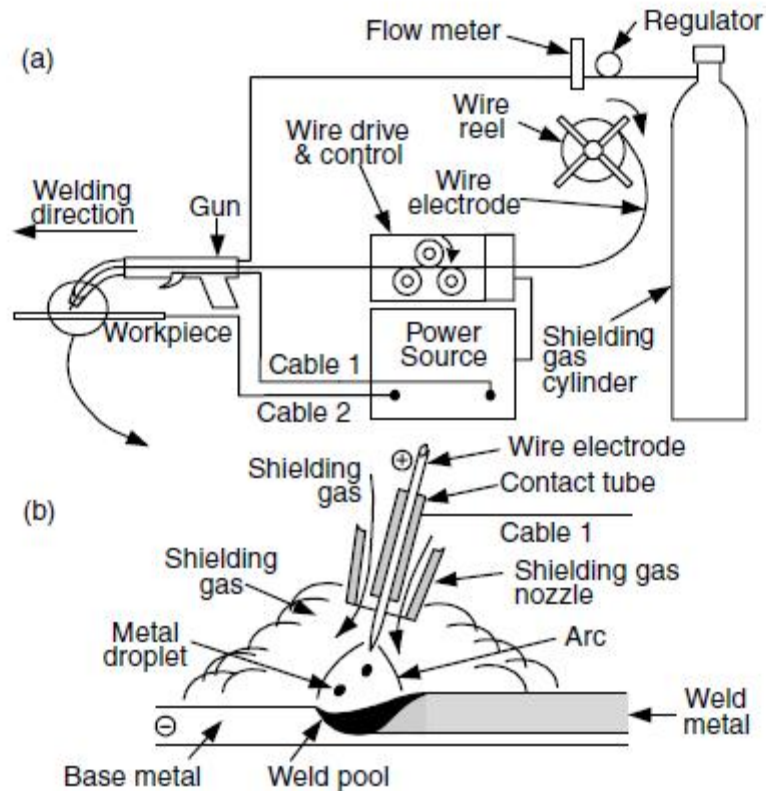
Gas-metal arc welding a) overall process; b) welding area enlarged [10]
